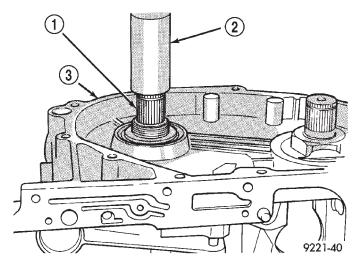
Use Arbor Press to Remove Output Shaft from Case
